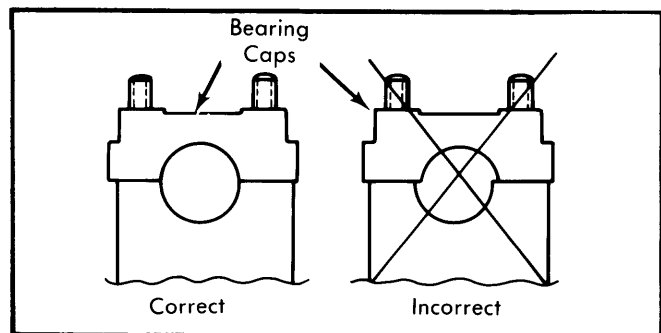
Camshaft Bearing Caps with Proper Off-Center Position
